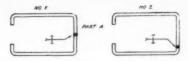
Main body member showing location of weld for quantity production (No. Y) and for limited production (No. Z).
